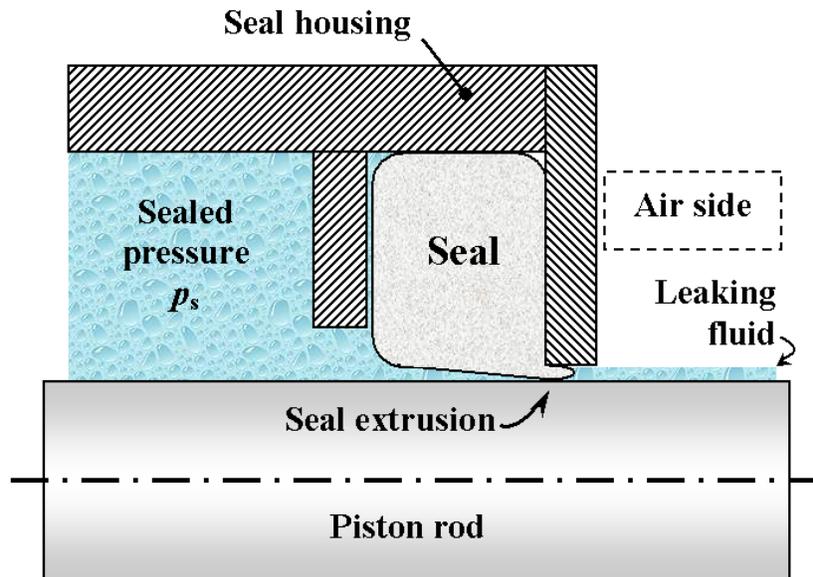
Extrusion of a rectangular, rounded, elastomeric, rod seal (only the upper half of the seal and housing shown)
